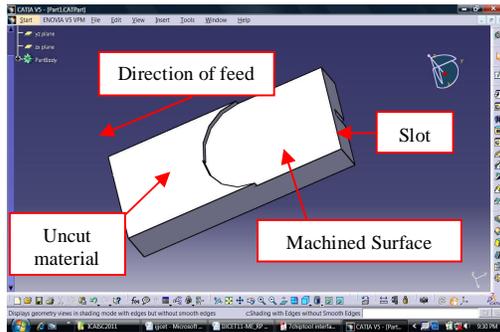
View of workpiece model showing slots for thermocouple inserts at the backside
